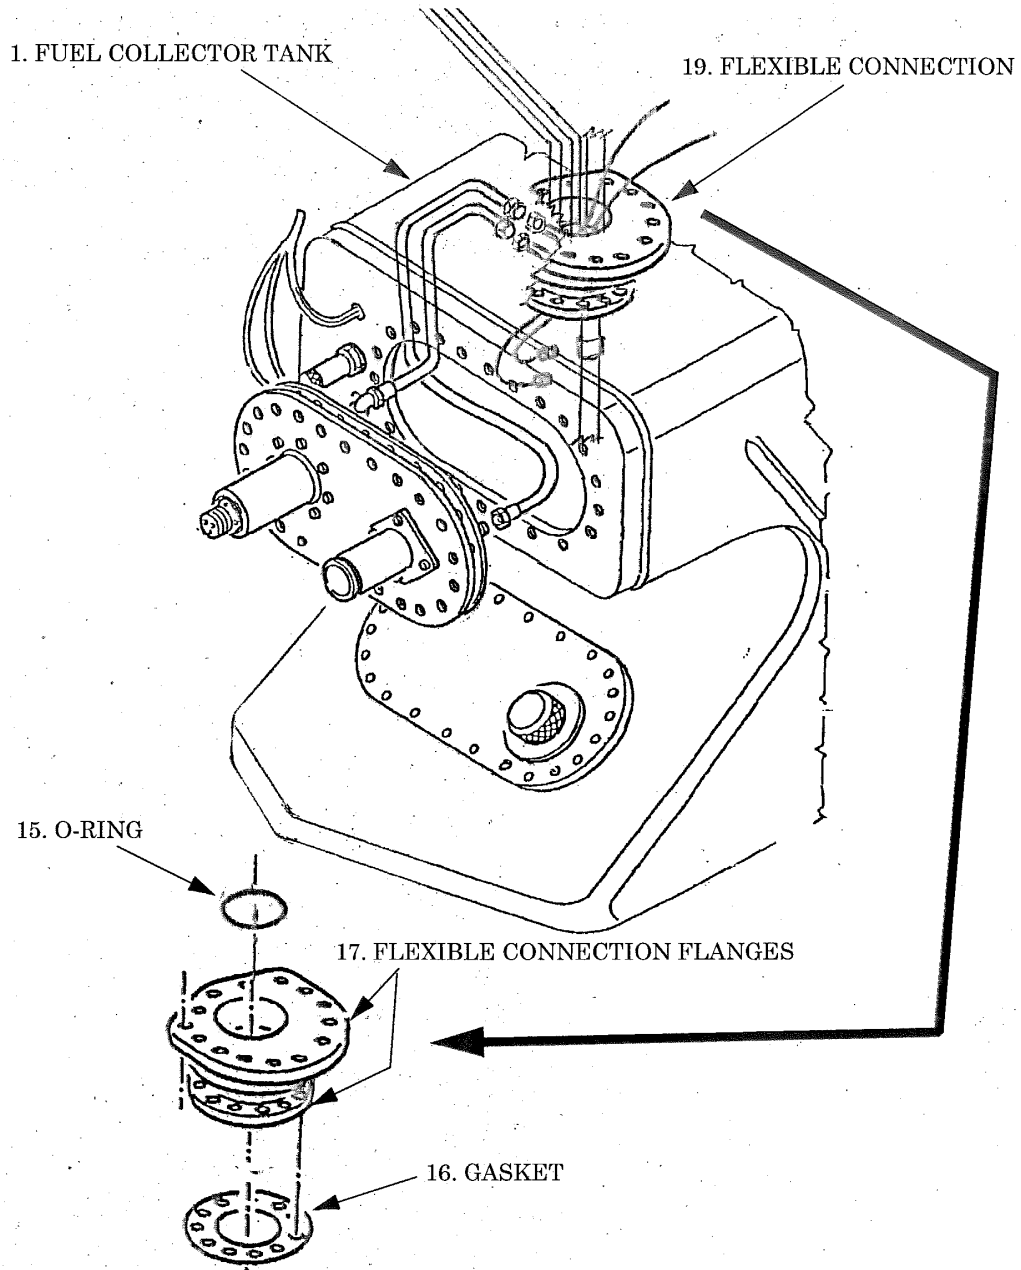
RH Collector Tank / Wing Flexible Connect. - Removal/Installat. (Sheet 1 of 3)
